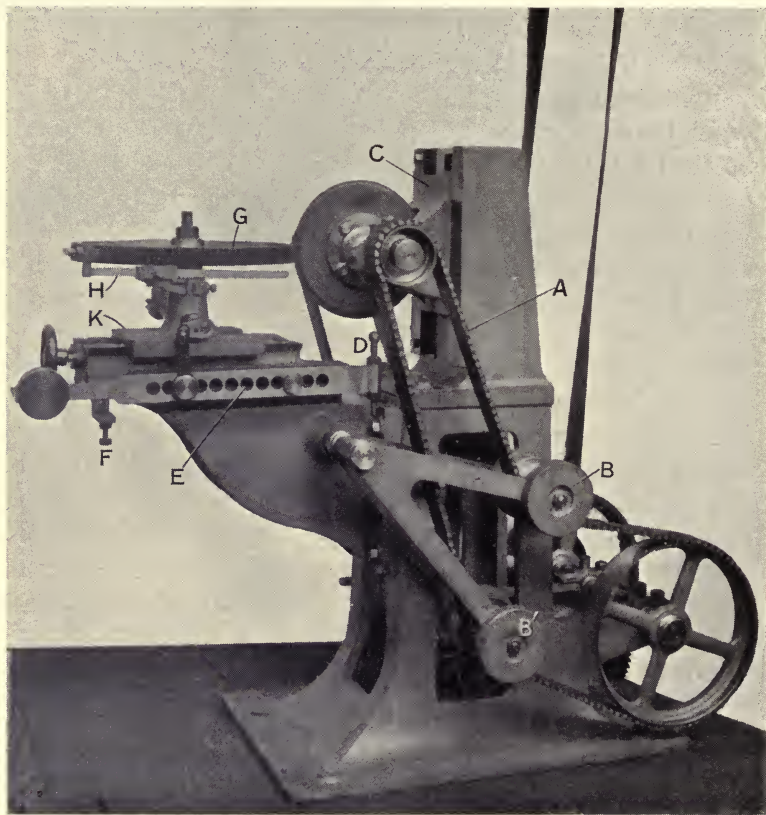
GEAR GRINDING MACHINE—L. STERNE & CO.
